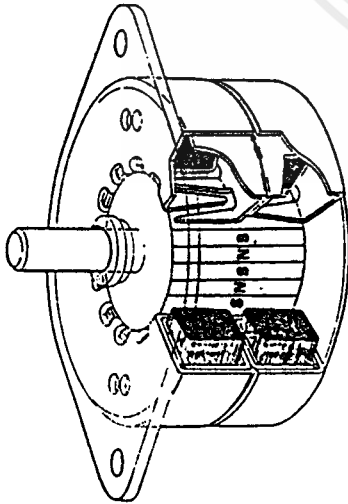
Cutaway diagram of a claw-tooth PM motor.
